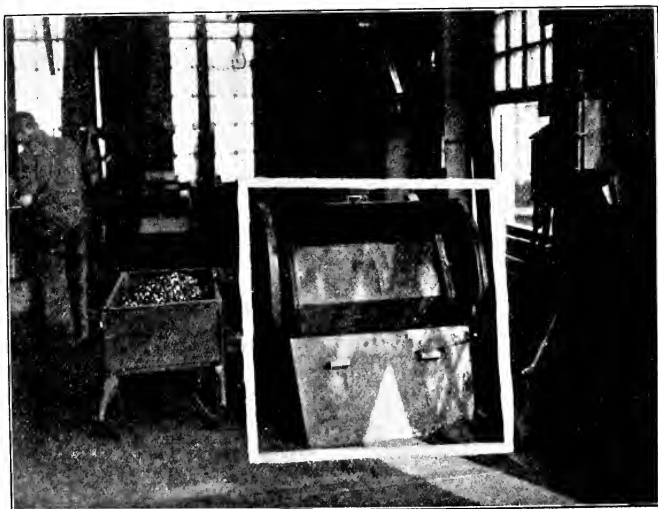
Illustration No. 14. Tumbling barrel with sheet metal inclosure. Sliding cover pushes back.
